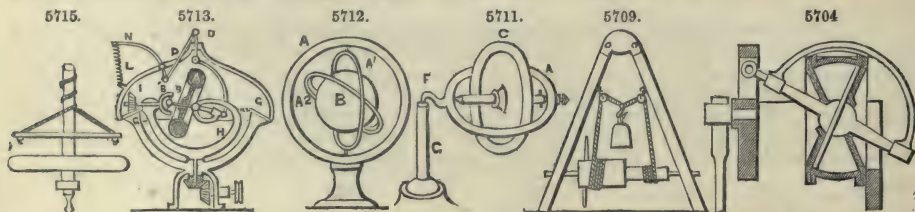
What is called the gyroscope governor, for steam-engines, introduced by Alban Anderson, in 1858. A is a heavy wheel, the axle B, B^1 , of which is made in two pieces connected together by a universal joint. The wheel A is on one piece, B, and a pinion I on the other piece, B^1 . The piece B is connected at its middle by a hinge-joint with the revolving frame H, so that variations in the inclination of the wheel A will cause the outer end of the piece B to rise and fall. The frame H is driven by bevel-gearing from the engine, and by that means the pinion I is carried round the stationary toothed circle G, and the wheel A is thus made to receive a rapid rotary motion on its axis. When the frame H and wheel A are in motion, the tendency of the wheel A is to assume a vertical position, but this tendency is opposed by a spring L. The greater velocity of the governor, the stronger is the tendency above mentioned, and the more it overcomes the force of the spring, and the reverse. The piece B is connected with the valve-rods by rods C, D, and the spring L is connected with the said rod by levers N and rod P.
